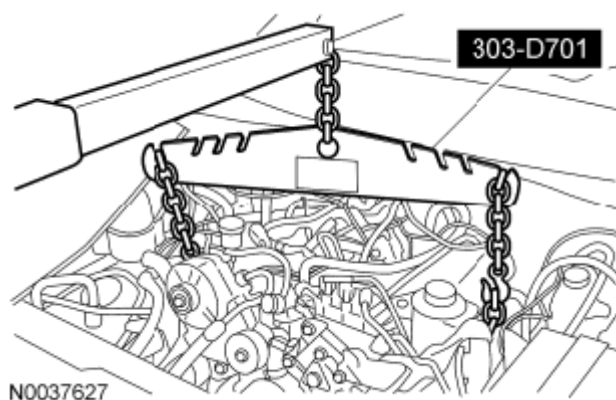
Attaching Spreader Bar And Using Suitable Floor Crane
